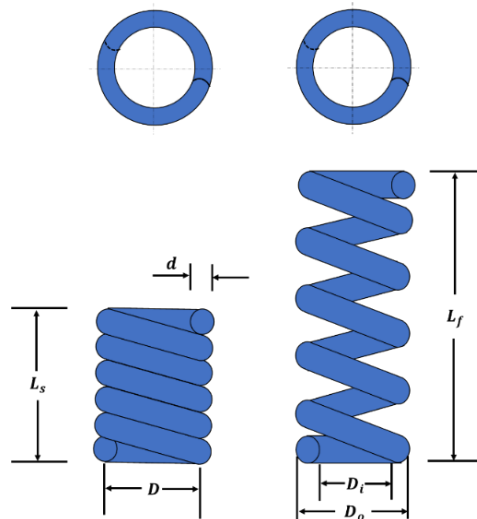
Dimensional Parameters of Helical Compression Spring.
